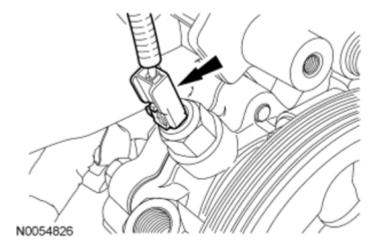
Locating PSP Switch Electrical Connector Courtesy of FORD MOTOR CO.
